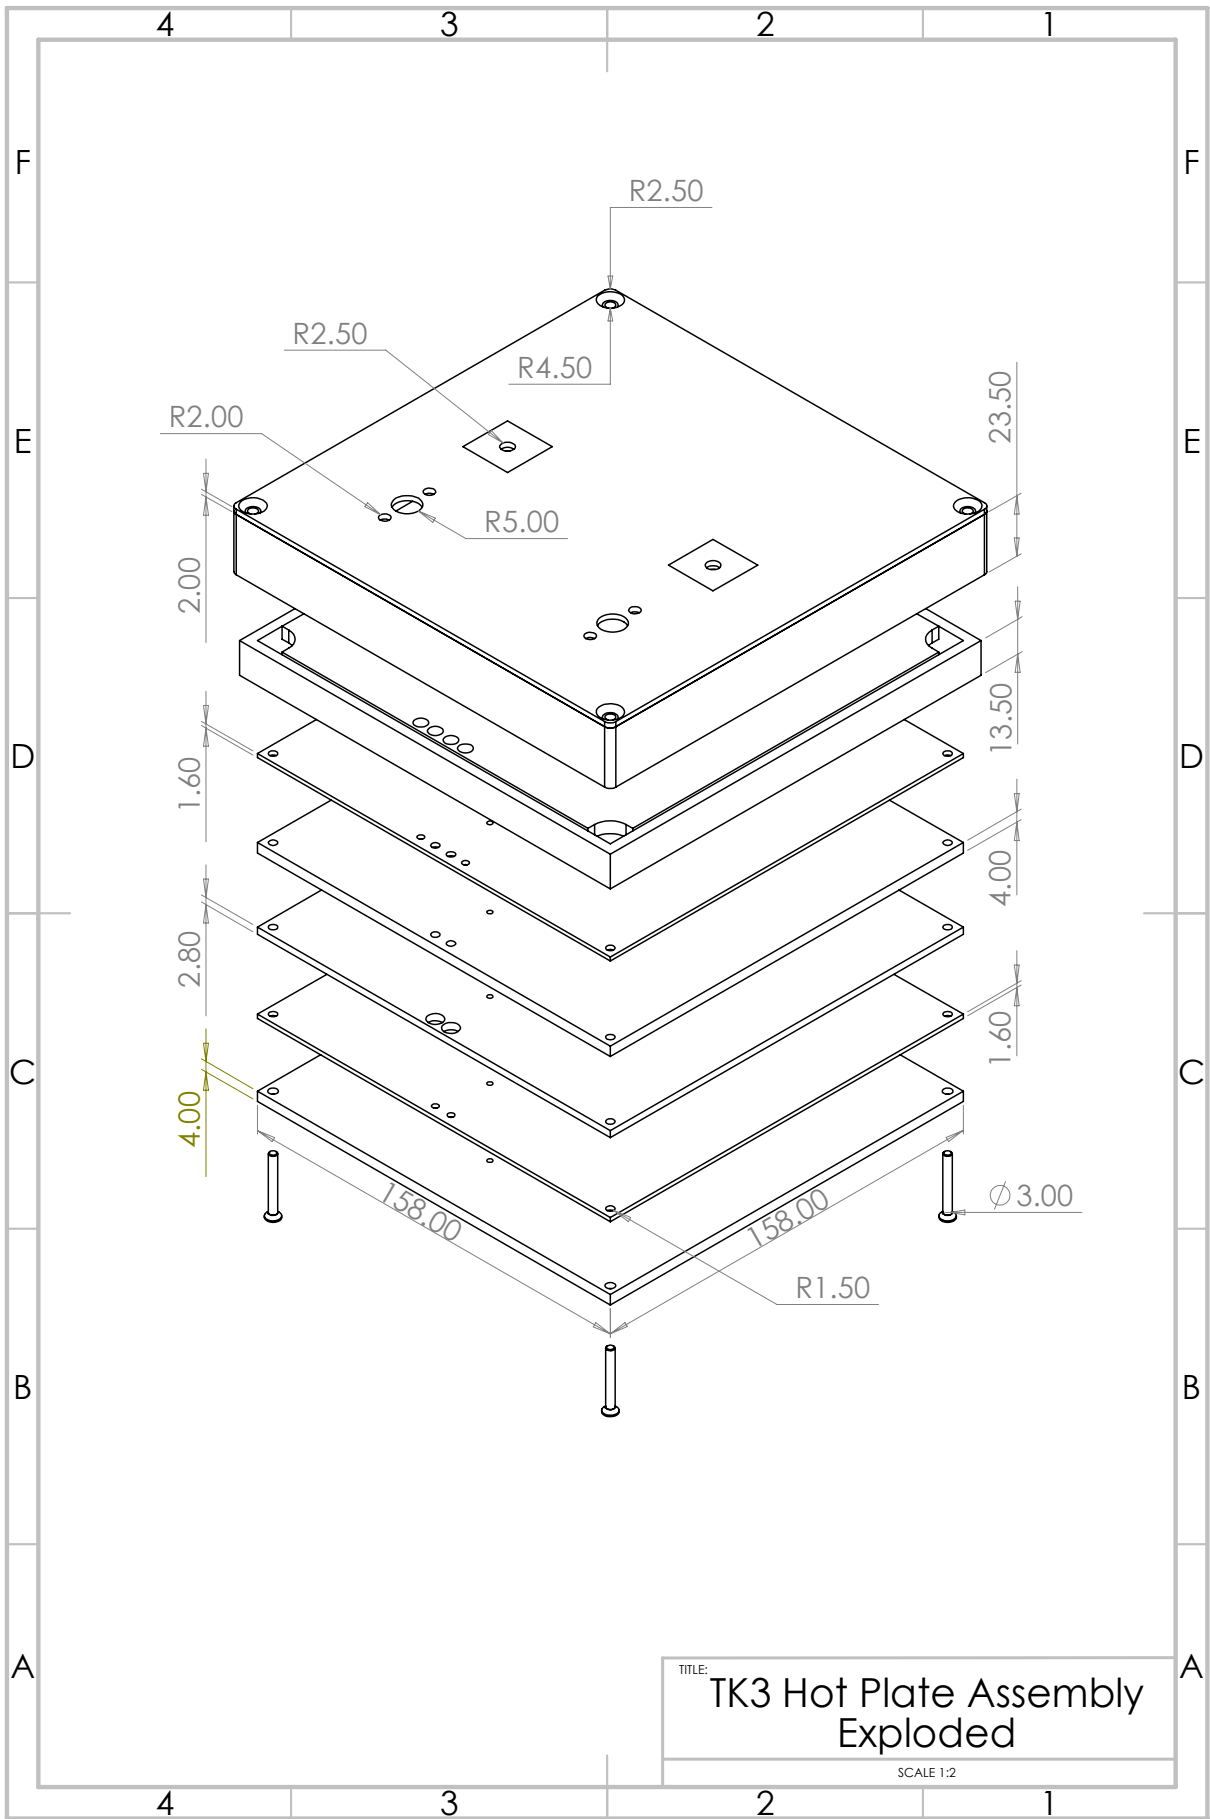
Technical Drawing of Hot Stage Assembly Exploded View
